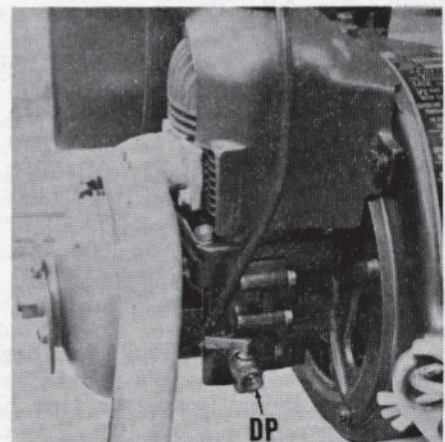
Governor adjusting screw (see Fig. HL45) is accessible on model 35 engines after removing drain petcock (DP).
